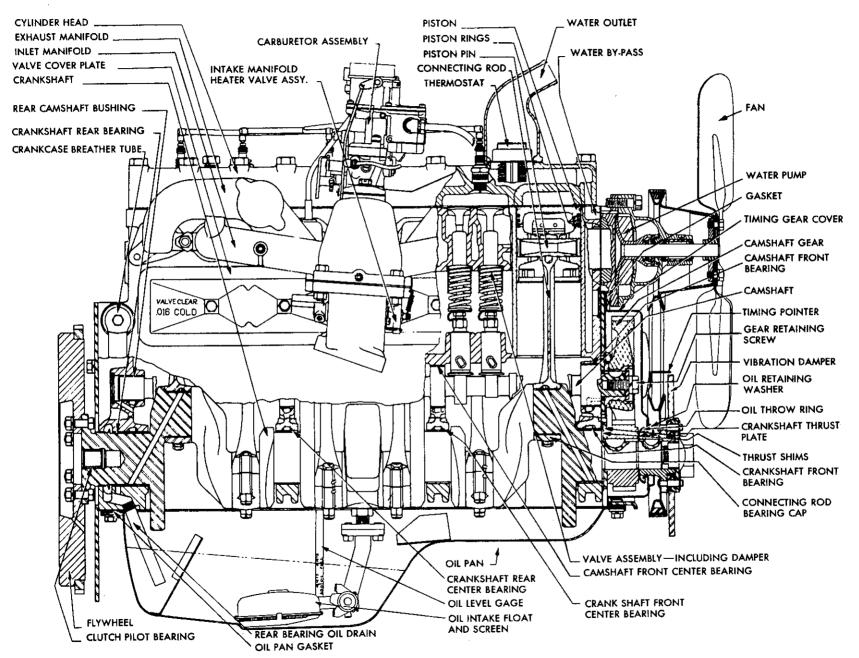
COMMANDER ENGINE SIDE VIEW
